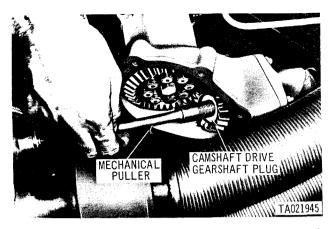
Removing or installing camshaft drive gearshaft plug.
